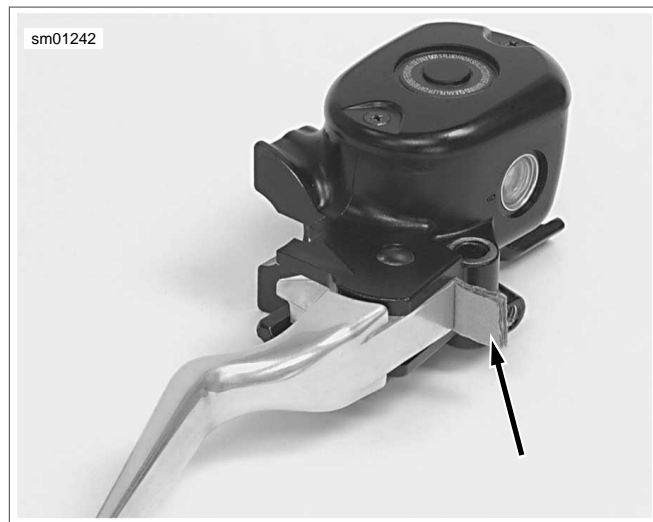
Install 5/32 in. (4 mm) Cardboard Insert Before Installing Master Cylinder Assembly
